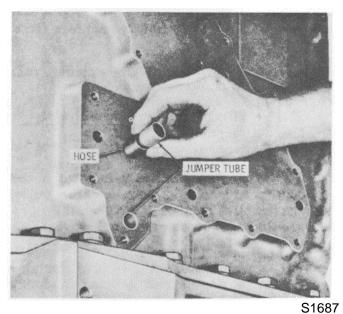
Installing First-and-Second-Gear and Third-and-Fourth-Gear Clutch Oil Jumper Tubes
